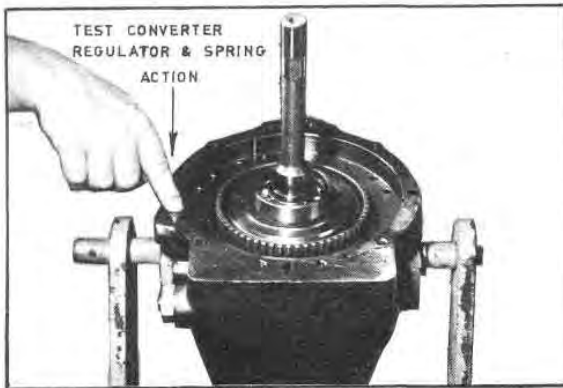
Compress the Converter Regulator Valve and Spring Action Prior to Removal
